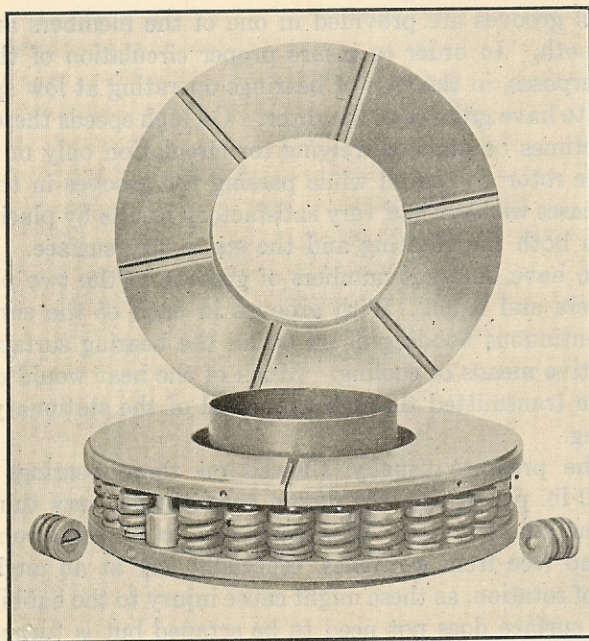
SPRING THRUST BEARING WITH "COMPRESSED SPRINGS" FOR MACHINES HAVING SMALL CLEARANCES
